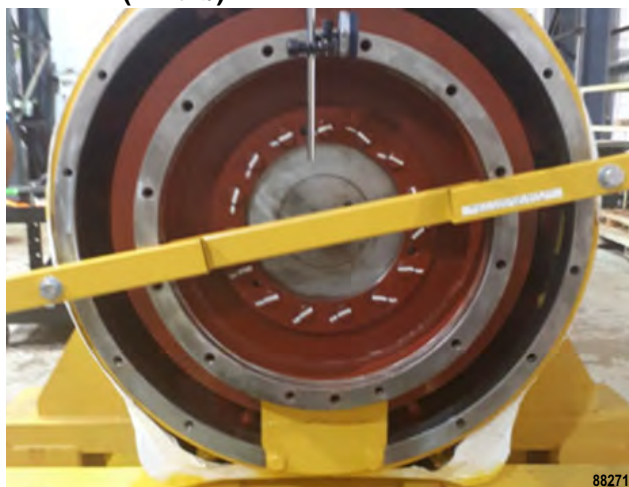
MOVING THE ALTERNATOR ROTOR
